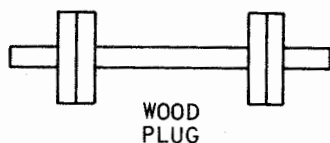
Wood Plug Used for Cutting Rigid Coaxial Line
